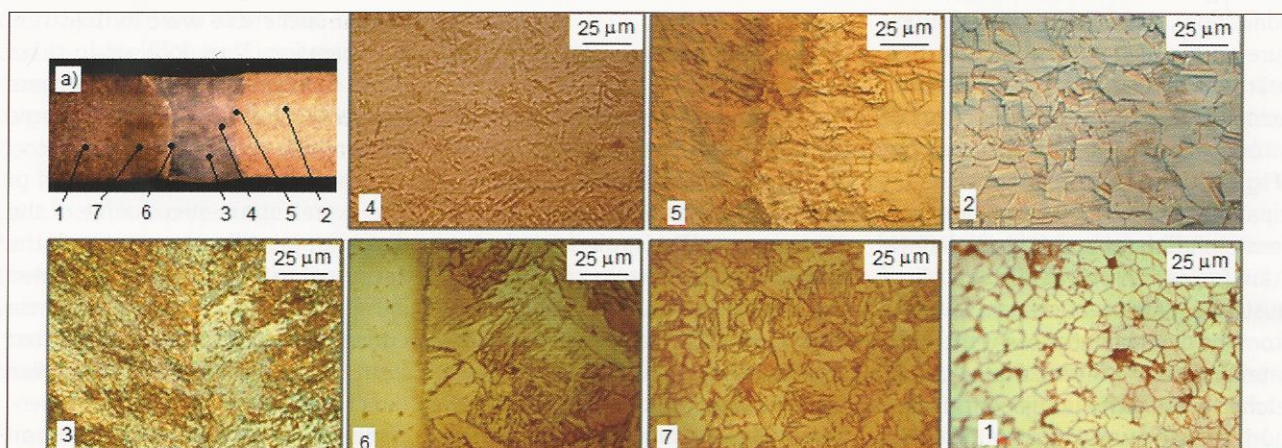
Typical microstructures found into the CS-SS autogenously laser welded joints: a) microstructures position; 1- BM (CS); 2 - BM (SS); 3 - weld central region; 4 - weld microstructure close to SS; 5 - weld fusion line and HAZ on SS side; 6 - weld fusion line and coarse grains of HAZ on CS side; 7 - refined grain region from CS HAZ; BM- base metal.
